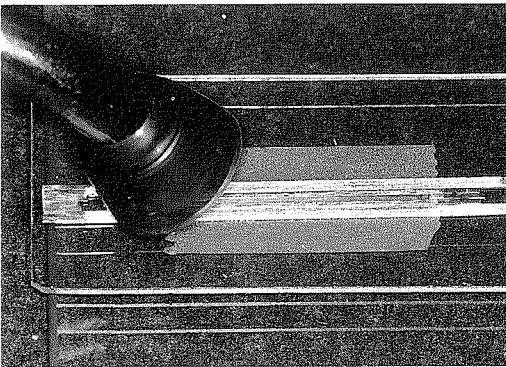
b Fabrication of FRP wire with rectangular cross-section using a metallic mold and glass slabs
